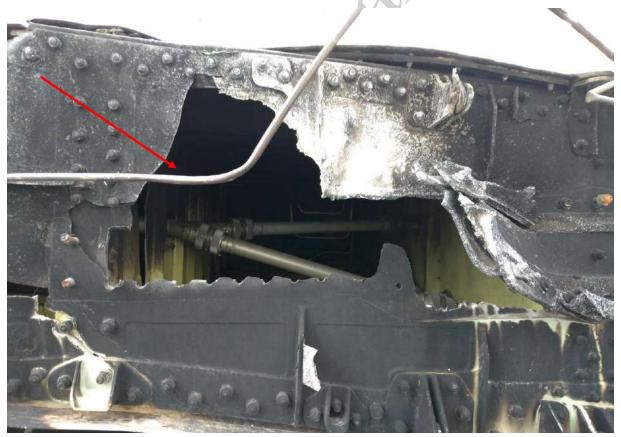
The hole in the left wing spar web at the actuating cylinder mounting location (pointed with arrow)
